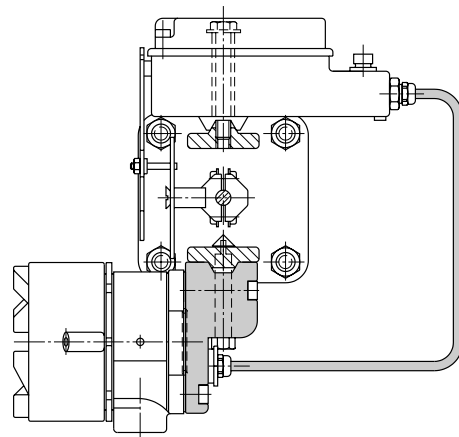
· NAMUR attachment to the control valve with Type 4765 Positioner
